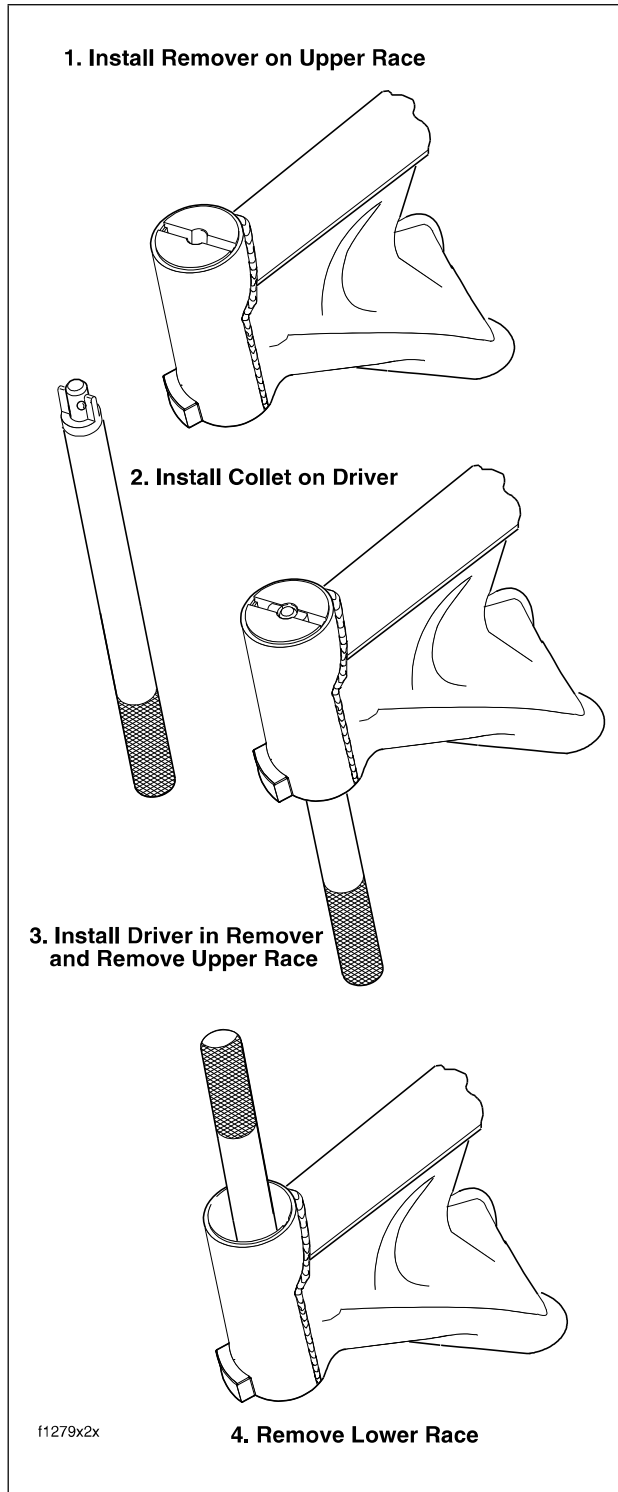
Remove Upper and Lower Steering Head Bearing Races
